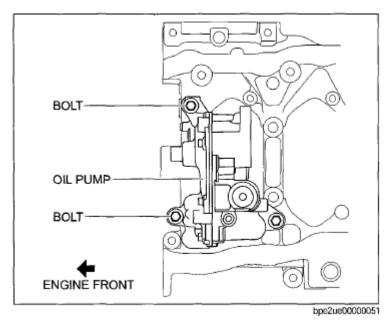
Identifying Oil Pump Assembly And Mounting Bolts
